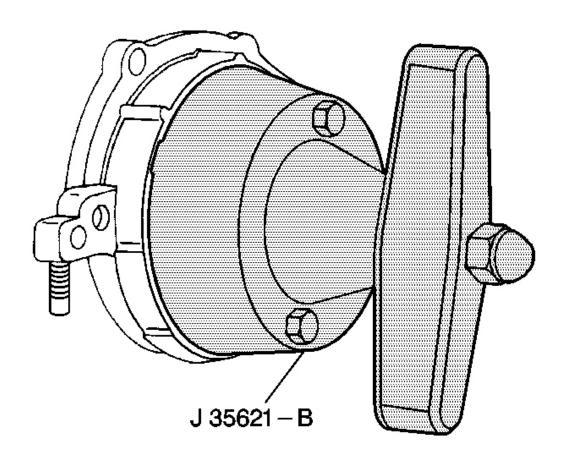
Installing Crankshaft Rear Oil Seal Using J 35621-B Courtesy of GENERAL MOTORS CORP.
